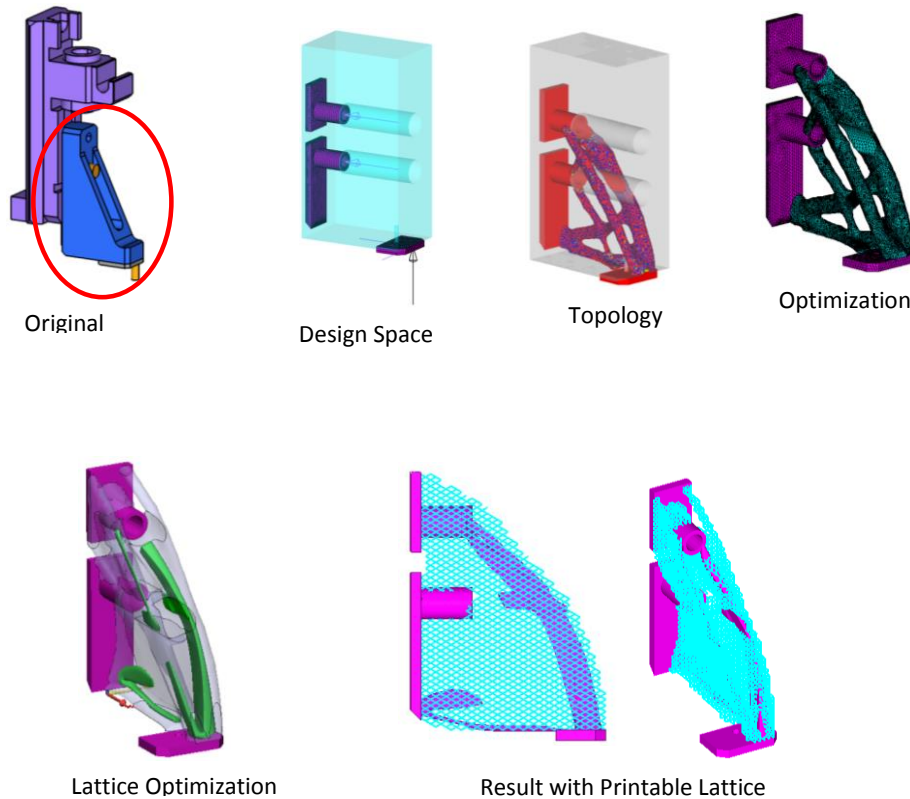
Topology and lattice optimization of a welding head bracket for Meconet Oy.
